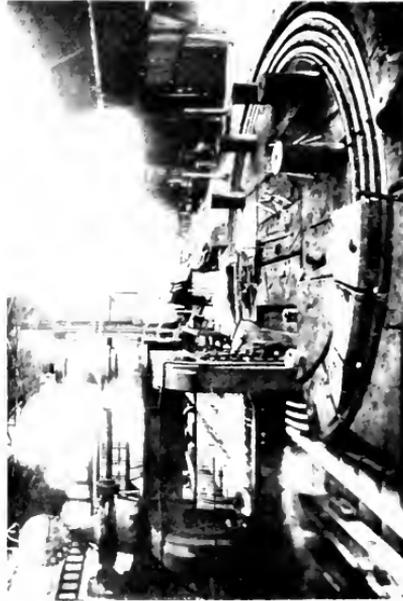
"Close Up" of Blooming Mill and Repeater Looking Toward the Soaking Pit Building
